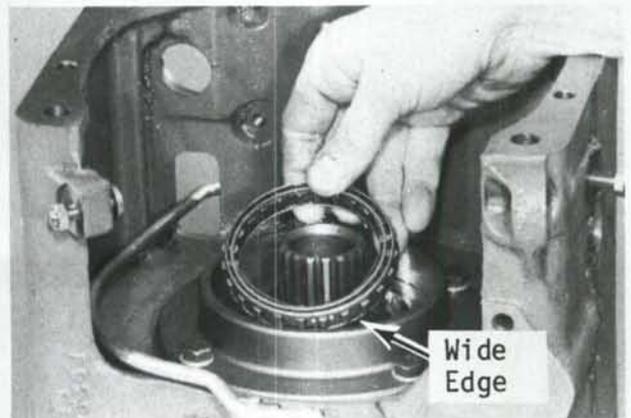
Install sprag clutch into carrier housing with wide edge facing inward as shown.
